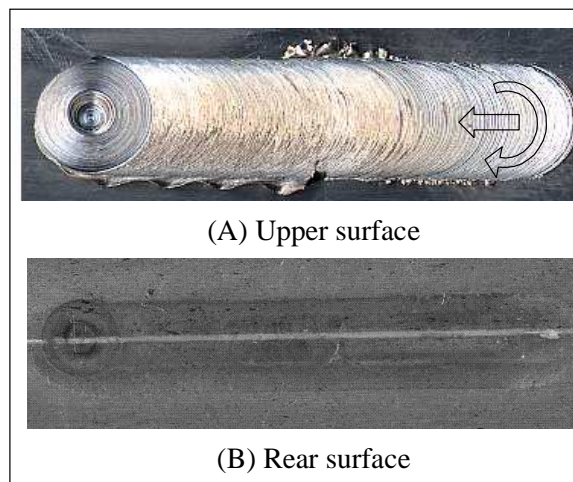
Top and bottom surface of AZ31B-H24 alloy FSW butt joint. (2000rpm, 100mm/min)
